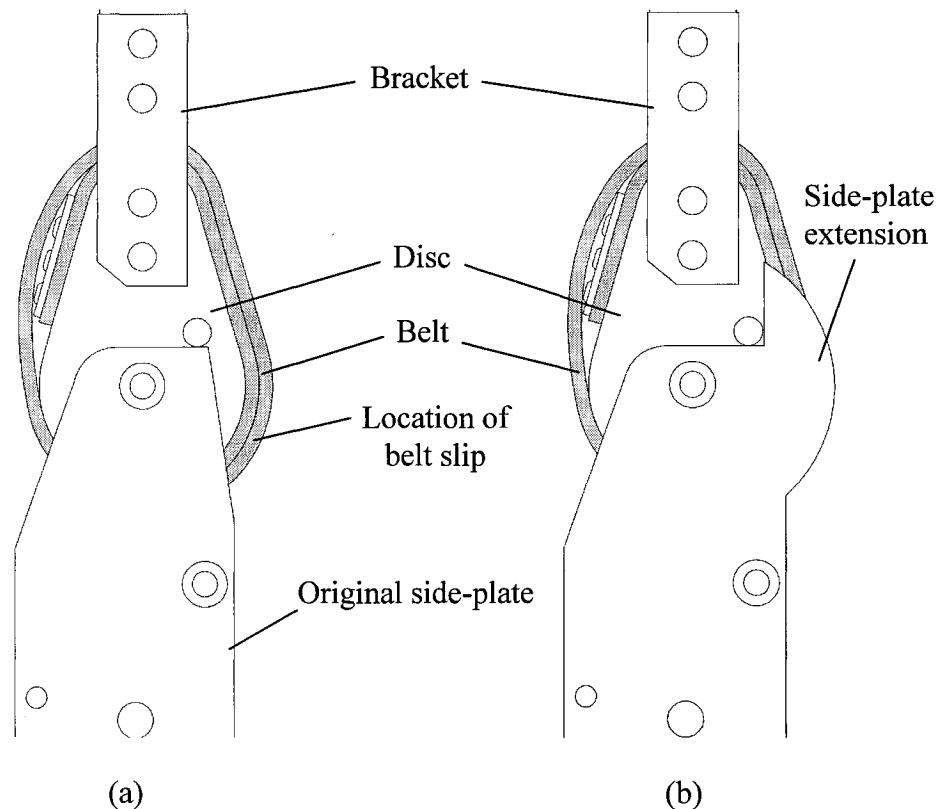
Side-plate modification; (a) initial side-plate design; (b) modified side-plate design.
